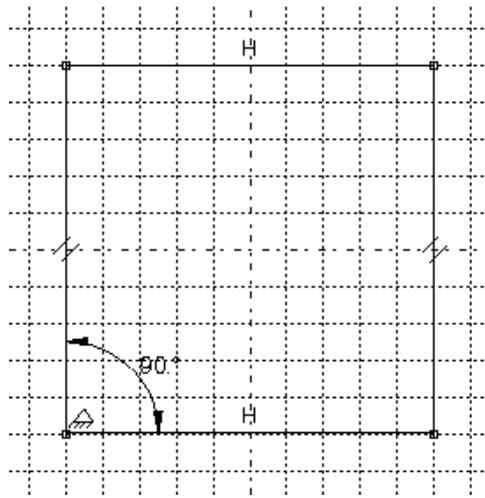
Dimension the angle at the lower left corner of the plate.
